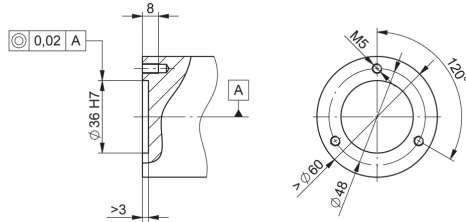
Mounting flange for installing Crank Angle Encoder Type 2614C11
